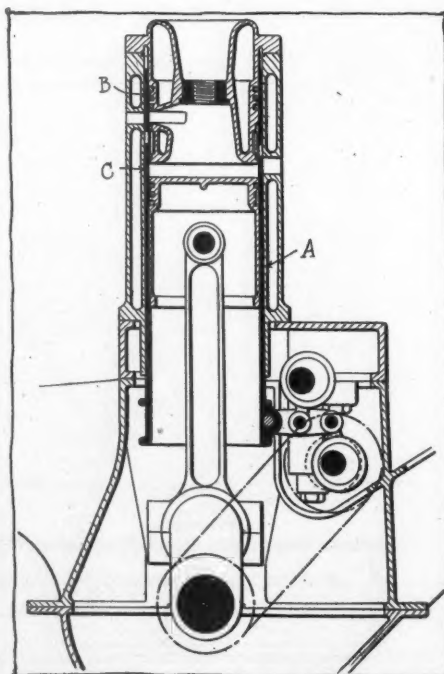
TYPE OF SLEEVE-VALVE MOTOR
